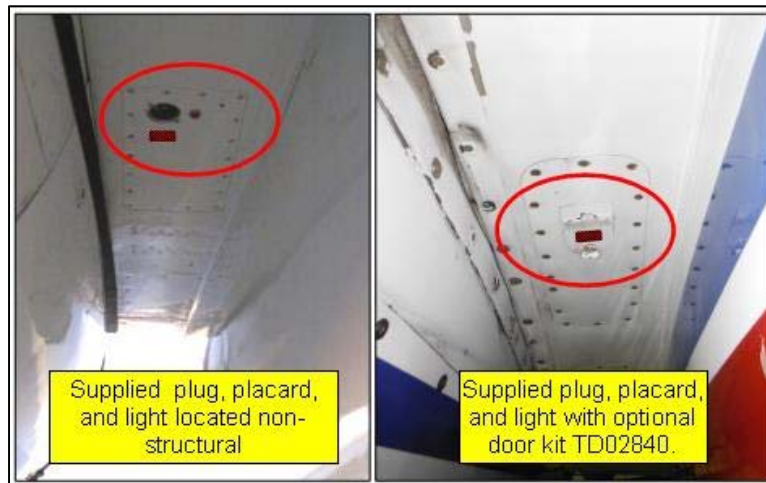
Examples of supplied plug and light located in non-structural inspection panel. Install with reference to instructions: plug TN02070, light TN03039, CPD drawing 03141.
